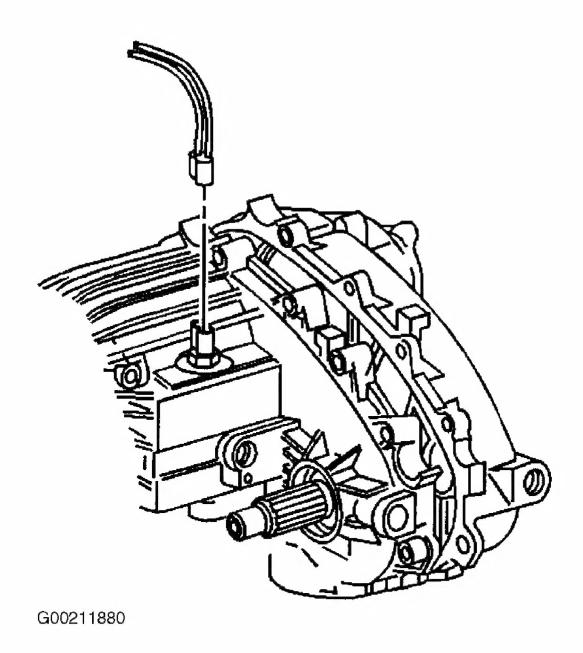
Removing Motor/Encoder Electrical Wiring Harness Courtesy of GENERAL MOTORS CORP.
